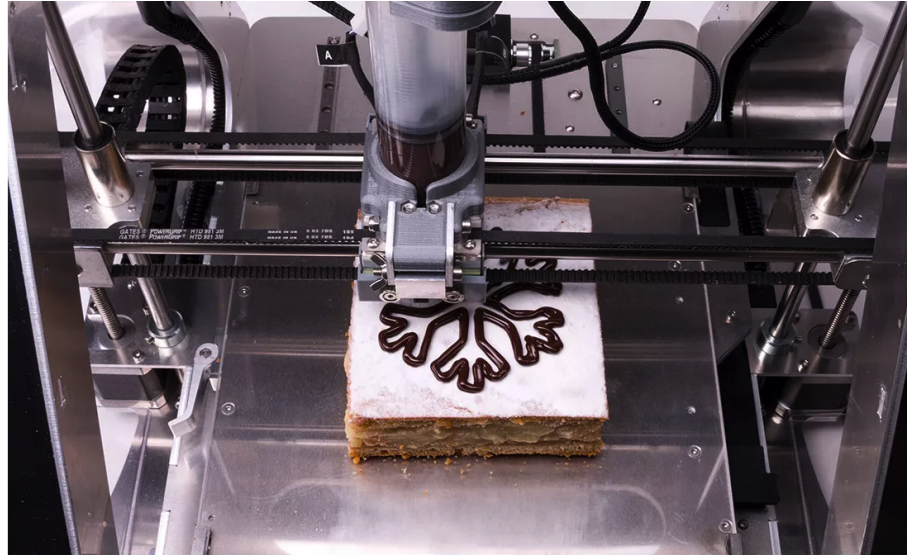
Simple 3D structures deposited using various paste-like materials through a bespoke extrusion toolhead developed to replace conventional FDM toolhead. Taken from [252].
